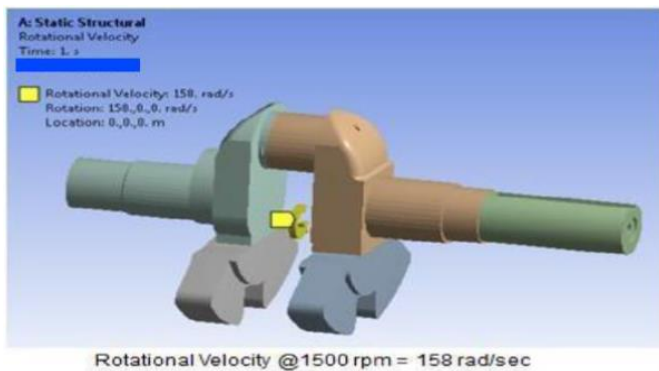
Crank Shaft Boundary Conditions for Fatigue analysis.
